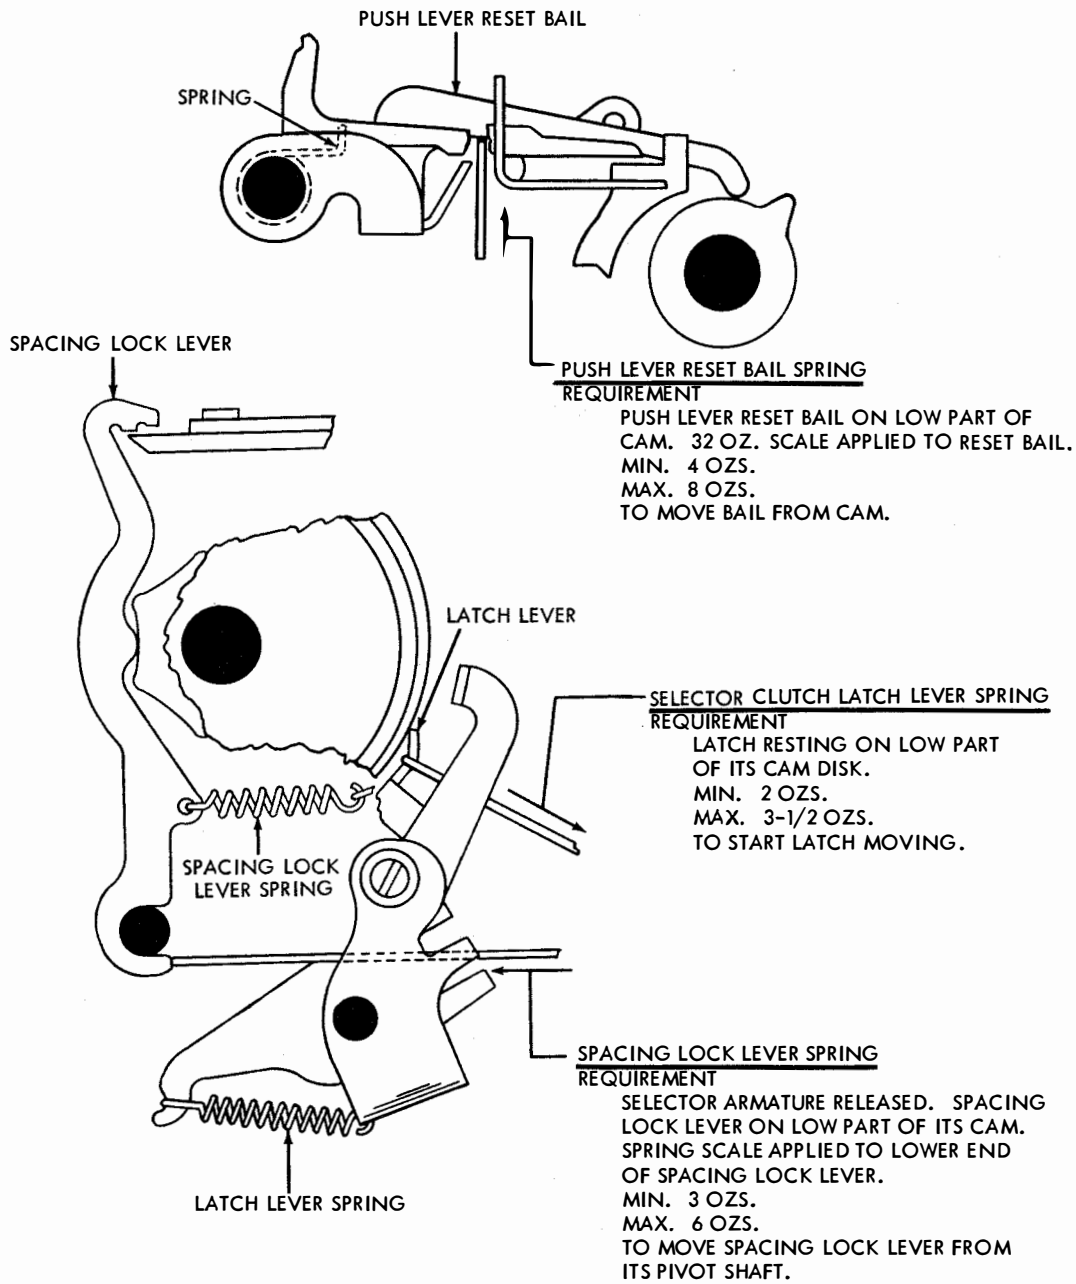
TYPING UNIT, SELECTOR CLUTCH MECHANISM, RIGHT SIDE VIEW
